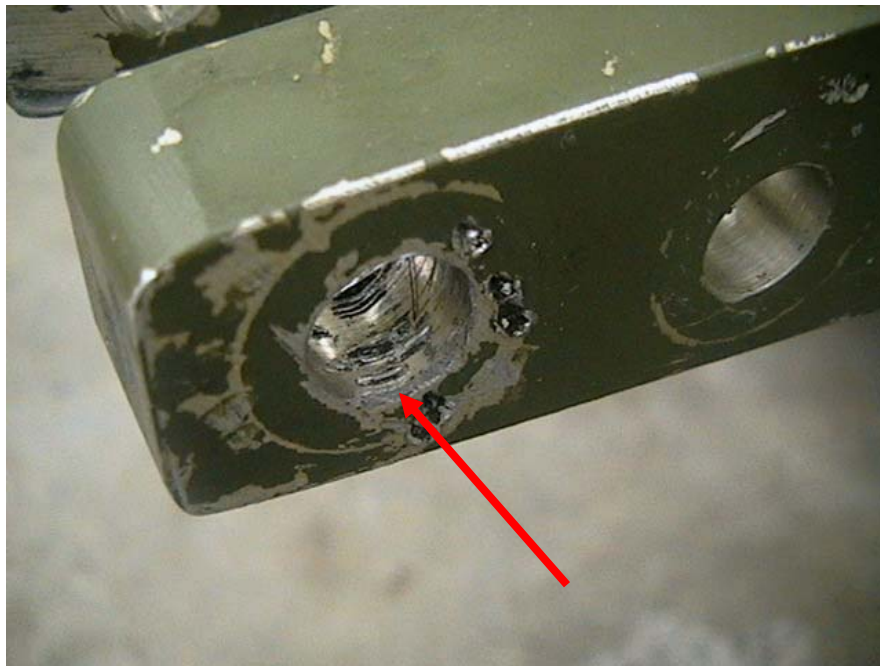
Example of Damage Induced During Removal of the Cessna 402C Stub Wing Attachment Fittings
